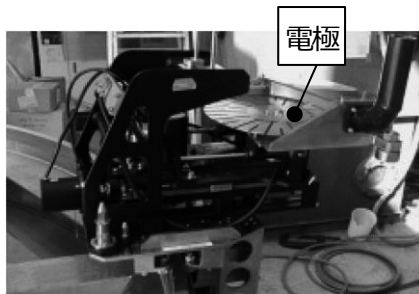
Appearance of Electrical Discharge Machining (EDM)
